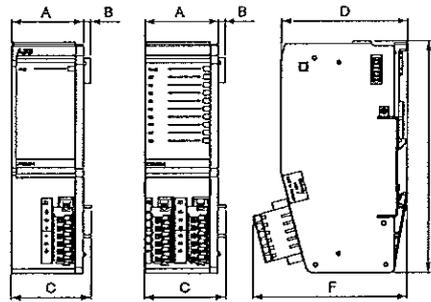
Dimension and mounting details of the PSVM/PSVLM/PSVLM/PSVLM/STO/ADAM/SCMB/USOML modules
